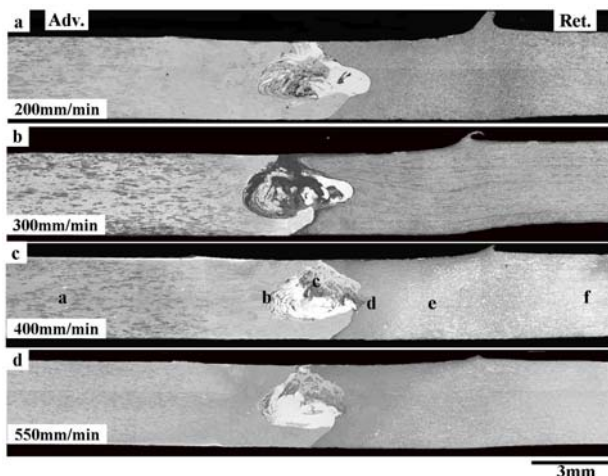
Macrostructures of joints welded at different welding speeds: (a) 200, (b) 300, (c): 400 and (d) 550 mm/min.
